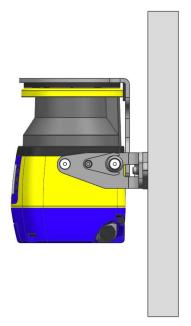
Scanner Mounting and Pitch Angle Adjustment
